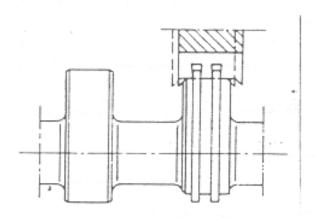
Patented CBN Comb Type Wheel for Rough Cam Grinder.
